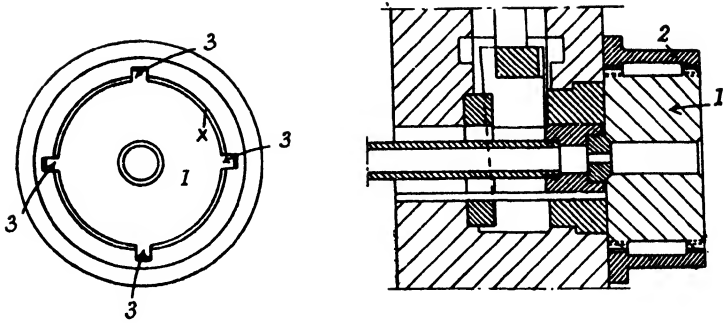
Method of mounting container in holder to permit radial expansion.
